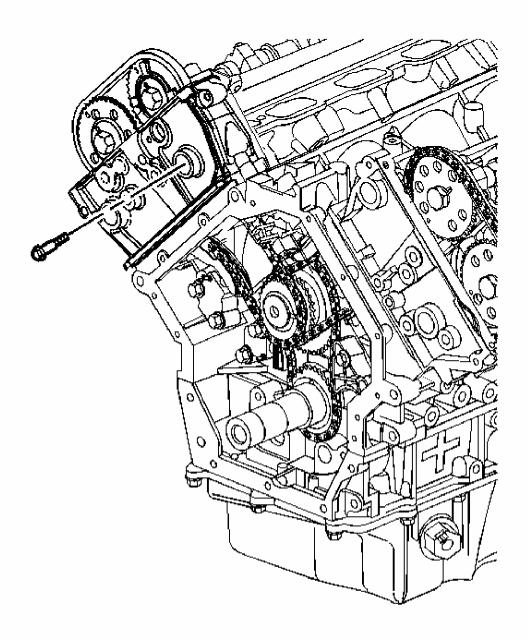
View Of Upper Right Secondary Camshaft Drive Chain Guide Bolt Courtesy of GENERAL MOTORS CORP.
